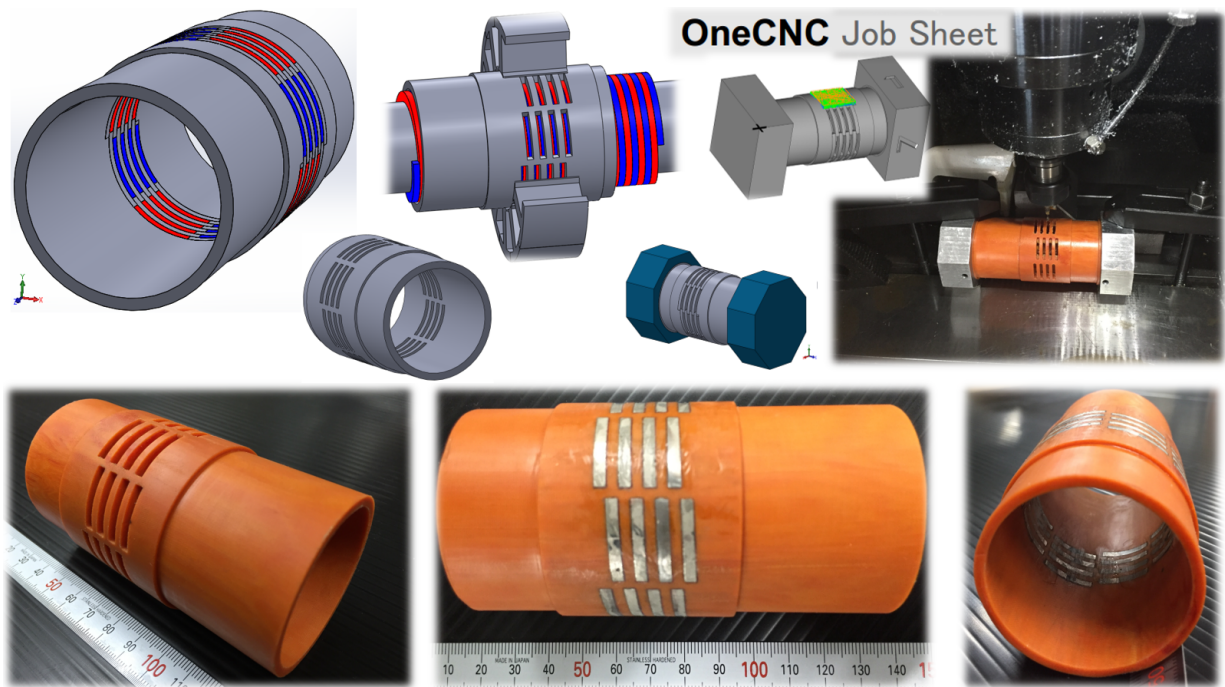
Rotor Frame with Embedded Helical-Shaped PM Manufacturing
